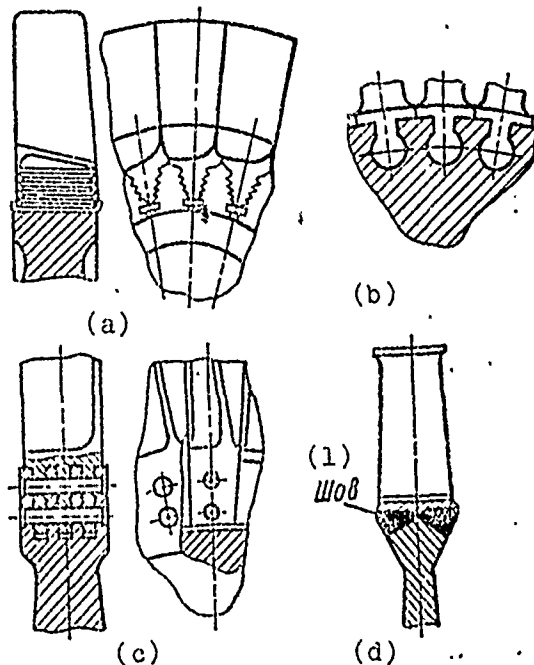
Various methods of bracing working blades to turbine disks: a - with a "tree" lock; b - with a cylindrical lock; c - with a "fork" lock; d - welded. KEY: (1) Seam.
